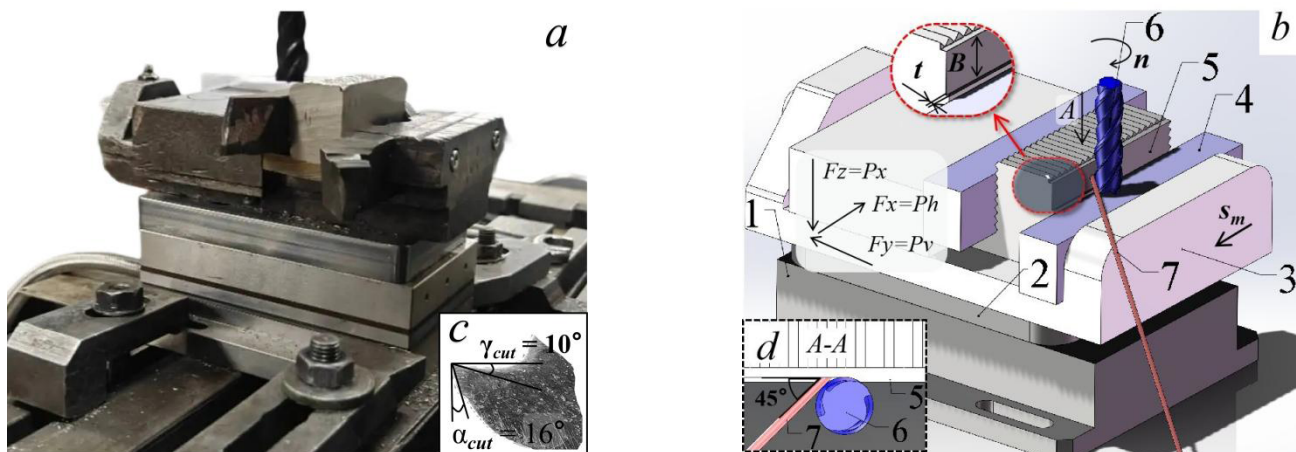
Photograph (a), three-dimensional model (b) of dynamometer, cutter, specimen, cutter tooth geometry installed in the main section plane (c), and position of the infrared thermometer beam, specimen and cutter along  $A$  arrow.  $B$  – milling width,  $t$  – milling depth,  $n$  – rotational speed of a cutter,  $s_m$  – feed per minute (d)
